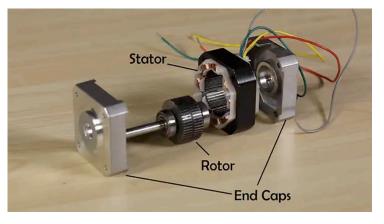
UNASSEMBLED STEPPER MOTOR
